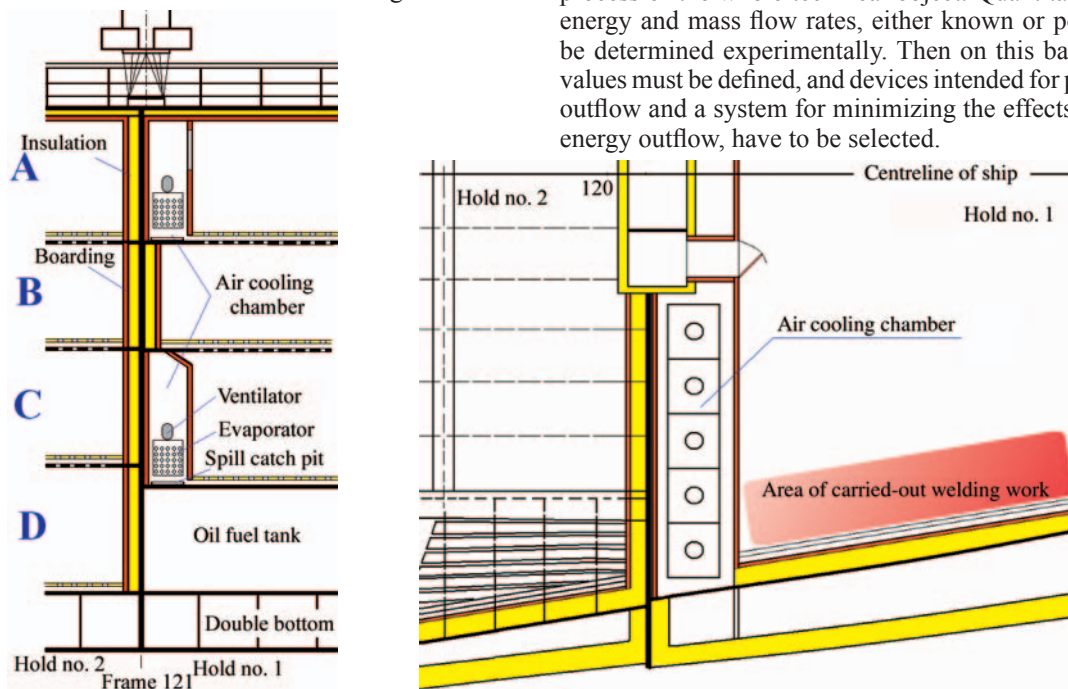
Location of welding work carried out in oil fuel tank of the example refrigerated ship
